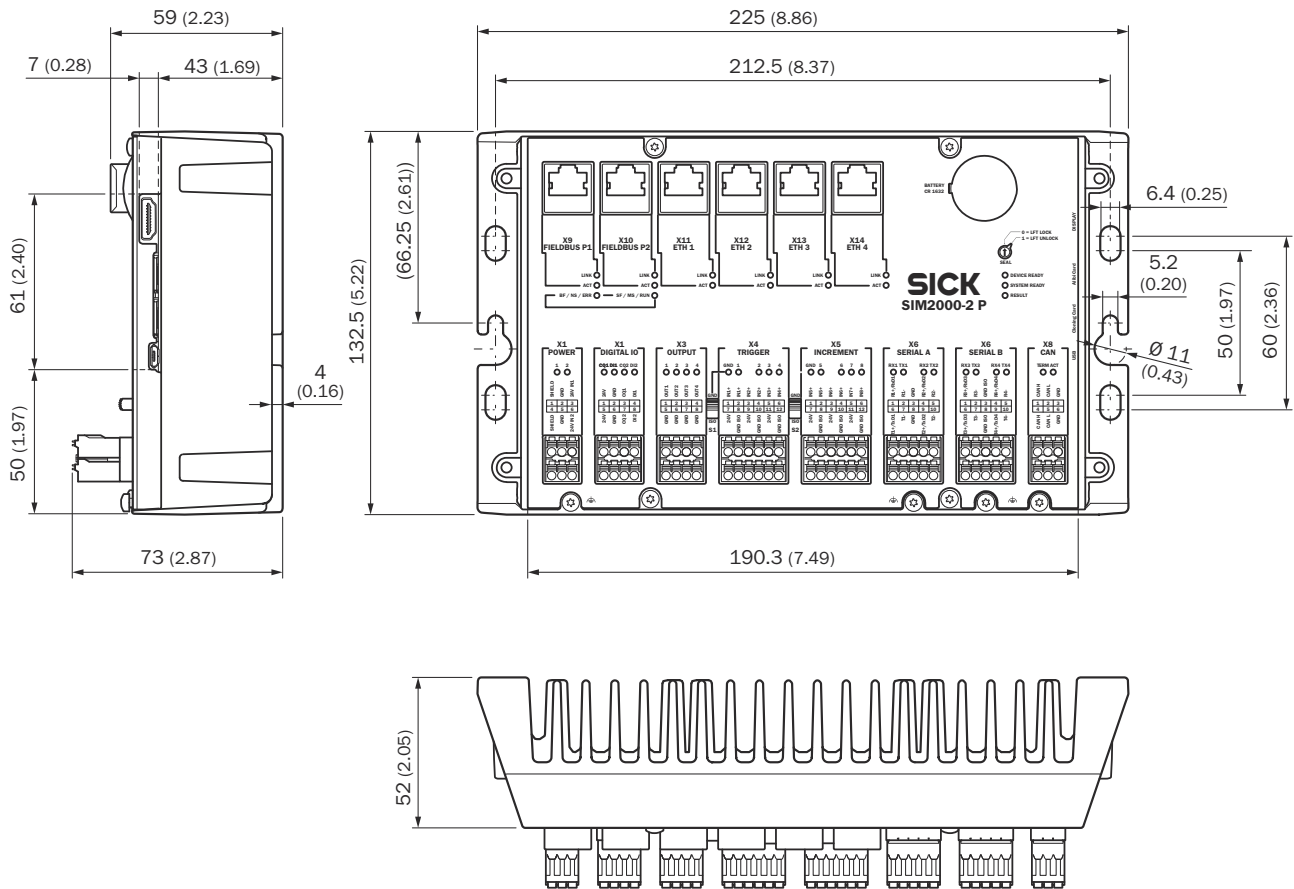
Dimensional drawing for SIM2000-2 P; All dimensions in mm (inch), decimal separator: period
